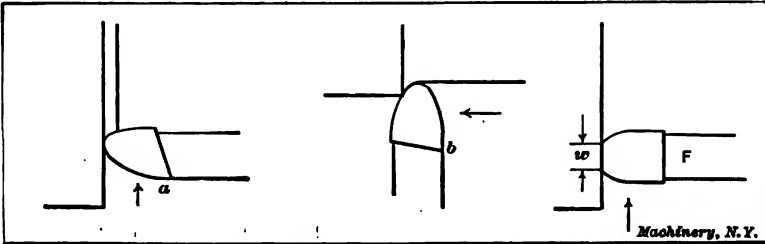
Top of Tool should Slope away from Working Part of Cutting Edge
